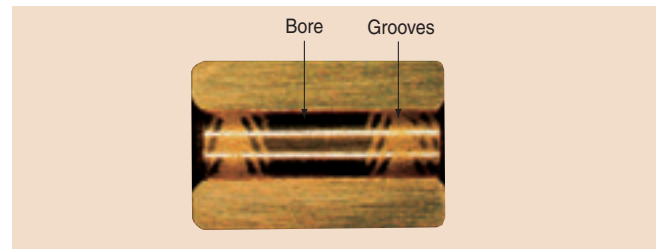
Oil-impregnated Bearing Oil Film and Movement of Oil
